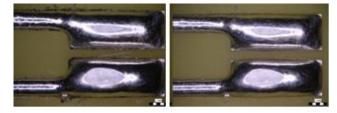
Two examples for test structure of Sn-Sb solder alloy after hand soldering and before WD test.
